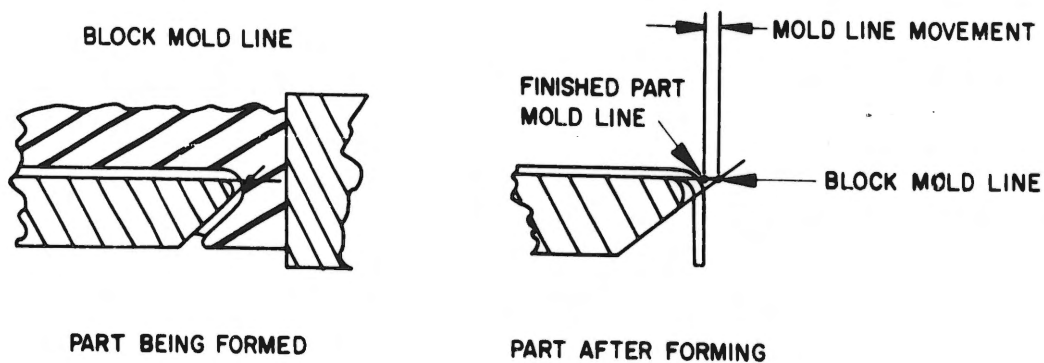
Mold Line Tolerance in Rubber Forming
